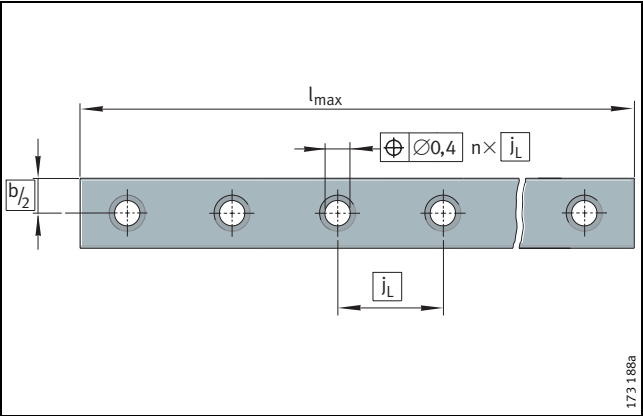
· Positional and length tolerances of guideways – hole pattern to ISO 1101
